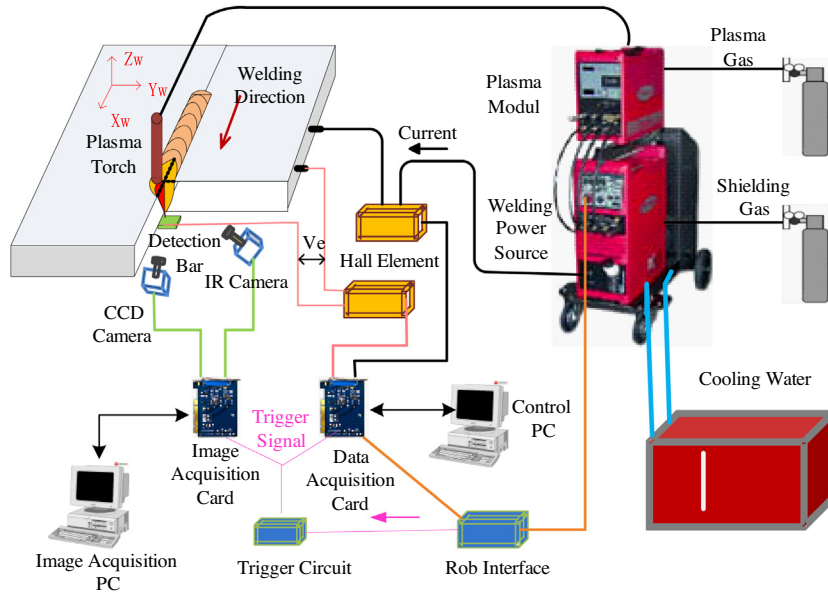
Schematic of experimental system for keyhole plasma arc welding.
